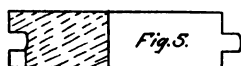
T & g sheathing can also be used to make picture frame moldings.
